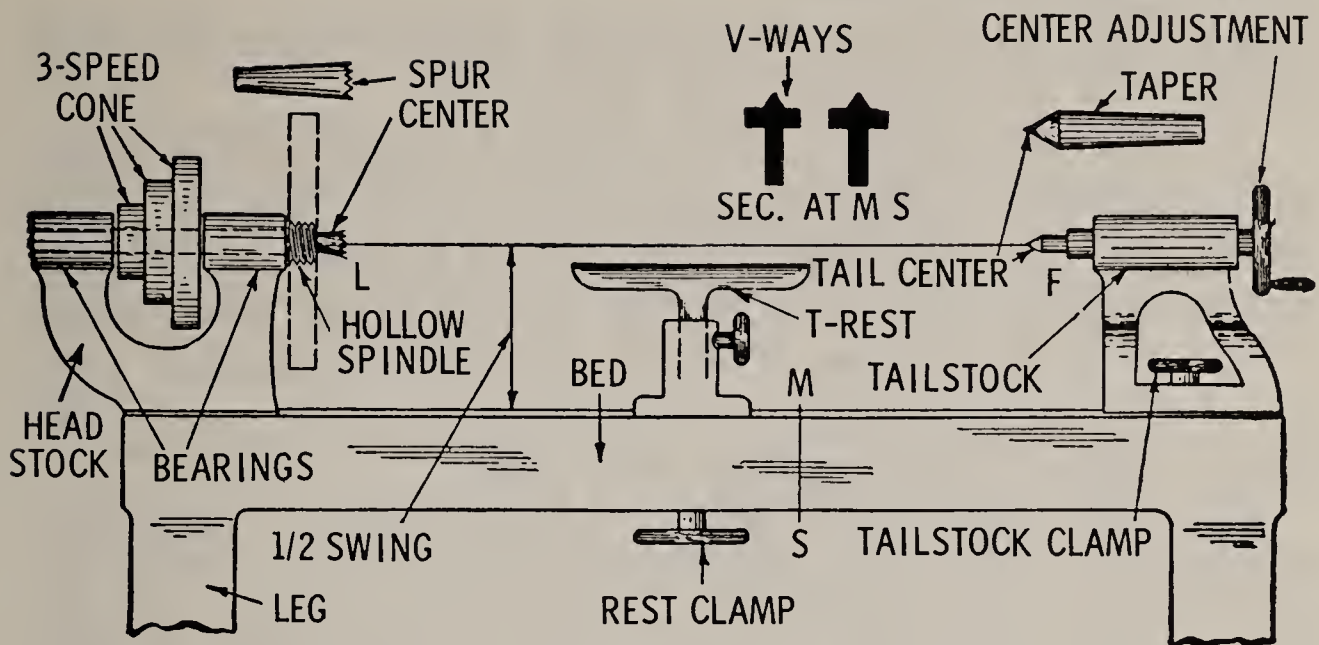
Essential parts of a woodturning lathe and section of bed at MS showing V-ways which register with V-grooves cut into bottom of headstock and tailstock.
